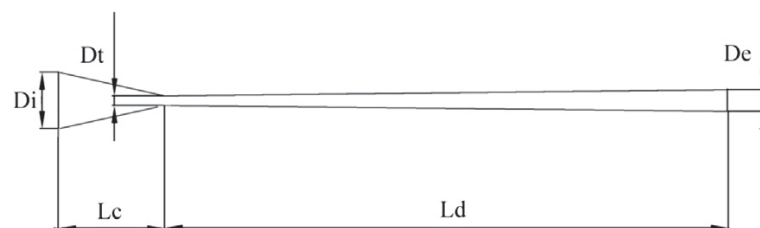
Schematic dimensions of cold spray nozzle geometry
